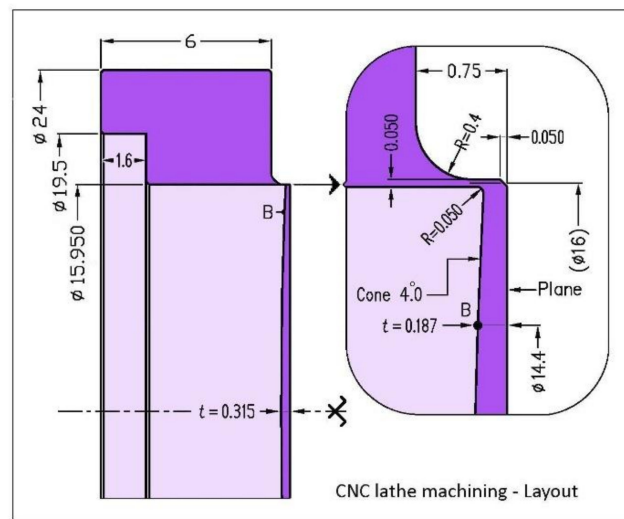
VCM substrate design layout for lathe machining. Dimensions [mm].
